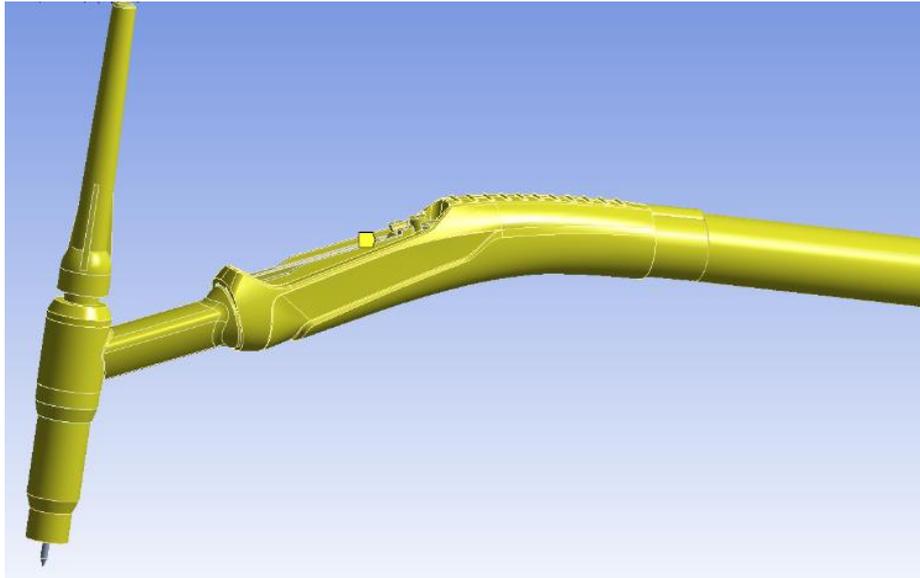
Convection was applied on the outer surfaces of the TIG welding torch.
